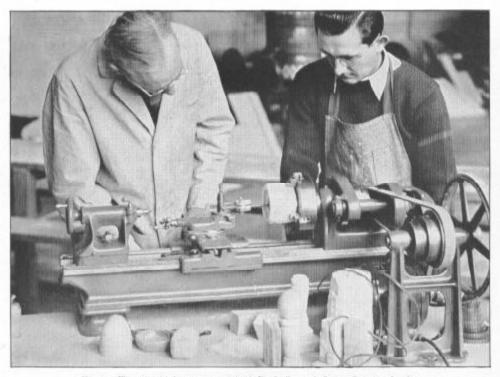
Turning Alabaster on a 9-inch Back-Geared, Screw Cutting Lathe.
